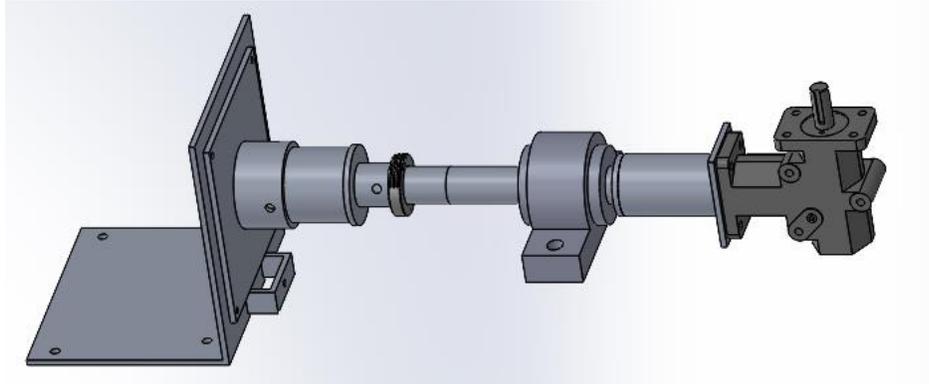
Shaft Housing Assembly, Middle Shaft Housing Locked in Place
